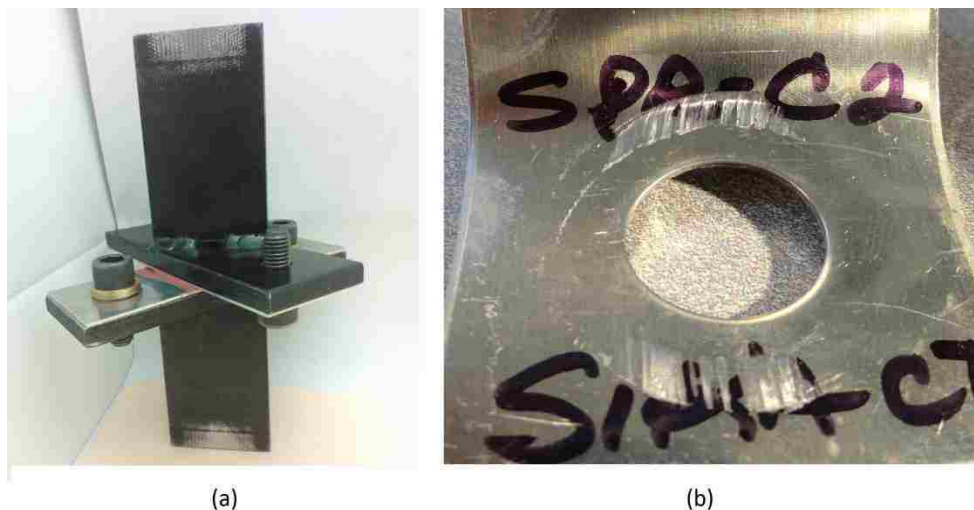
(a) fixture used for the tensile tests of the cross tension joints. (b) Scratches left by the washer on the surface of the blank because of the inward movement of the blank.
